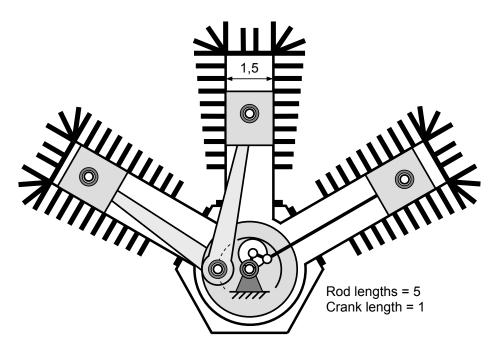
Constructive restriction of the half-radial machine. Cardan gear mechanism versus slider-crank mechanism.
